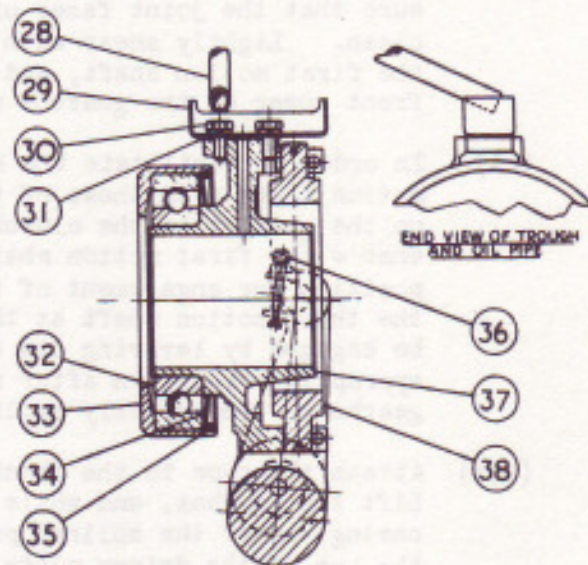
SECTION THROUGH CLUTCH RELEASE BEARING AND TRUNNION.
